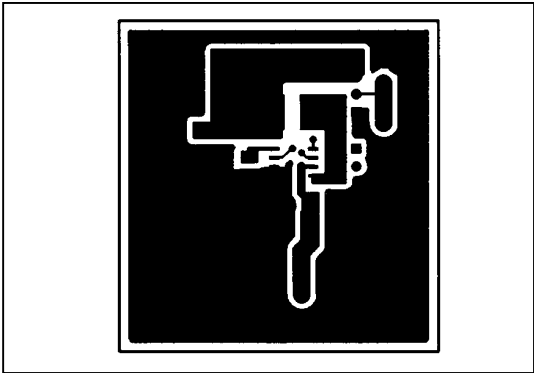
MAX778 EV Kit PC Layout (Component Side)
